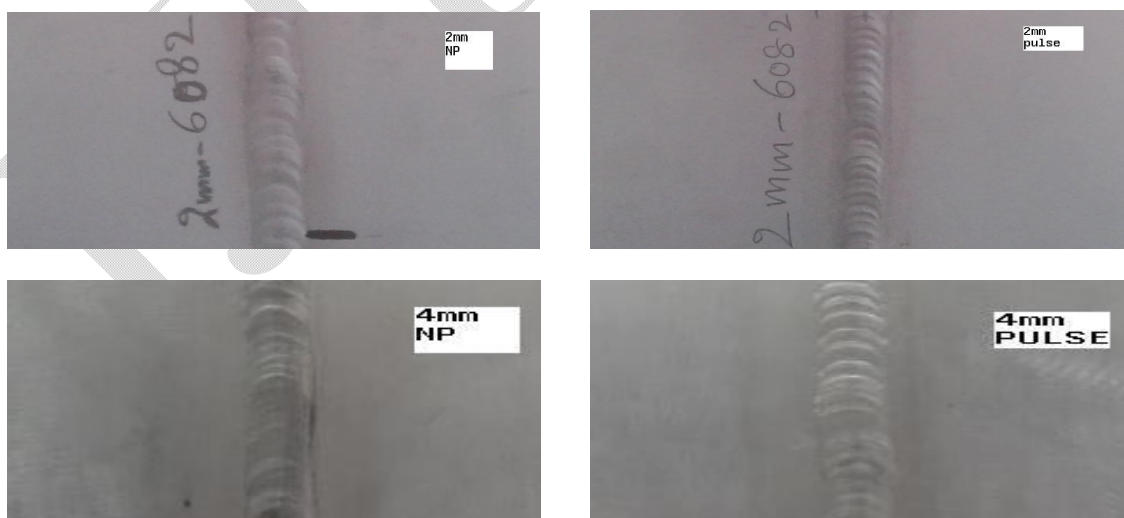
Weldments of AA6082-T6 Aluminium Alloy sheets
